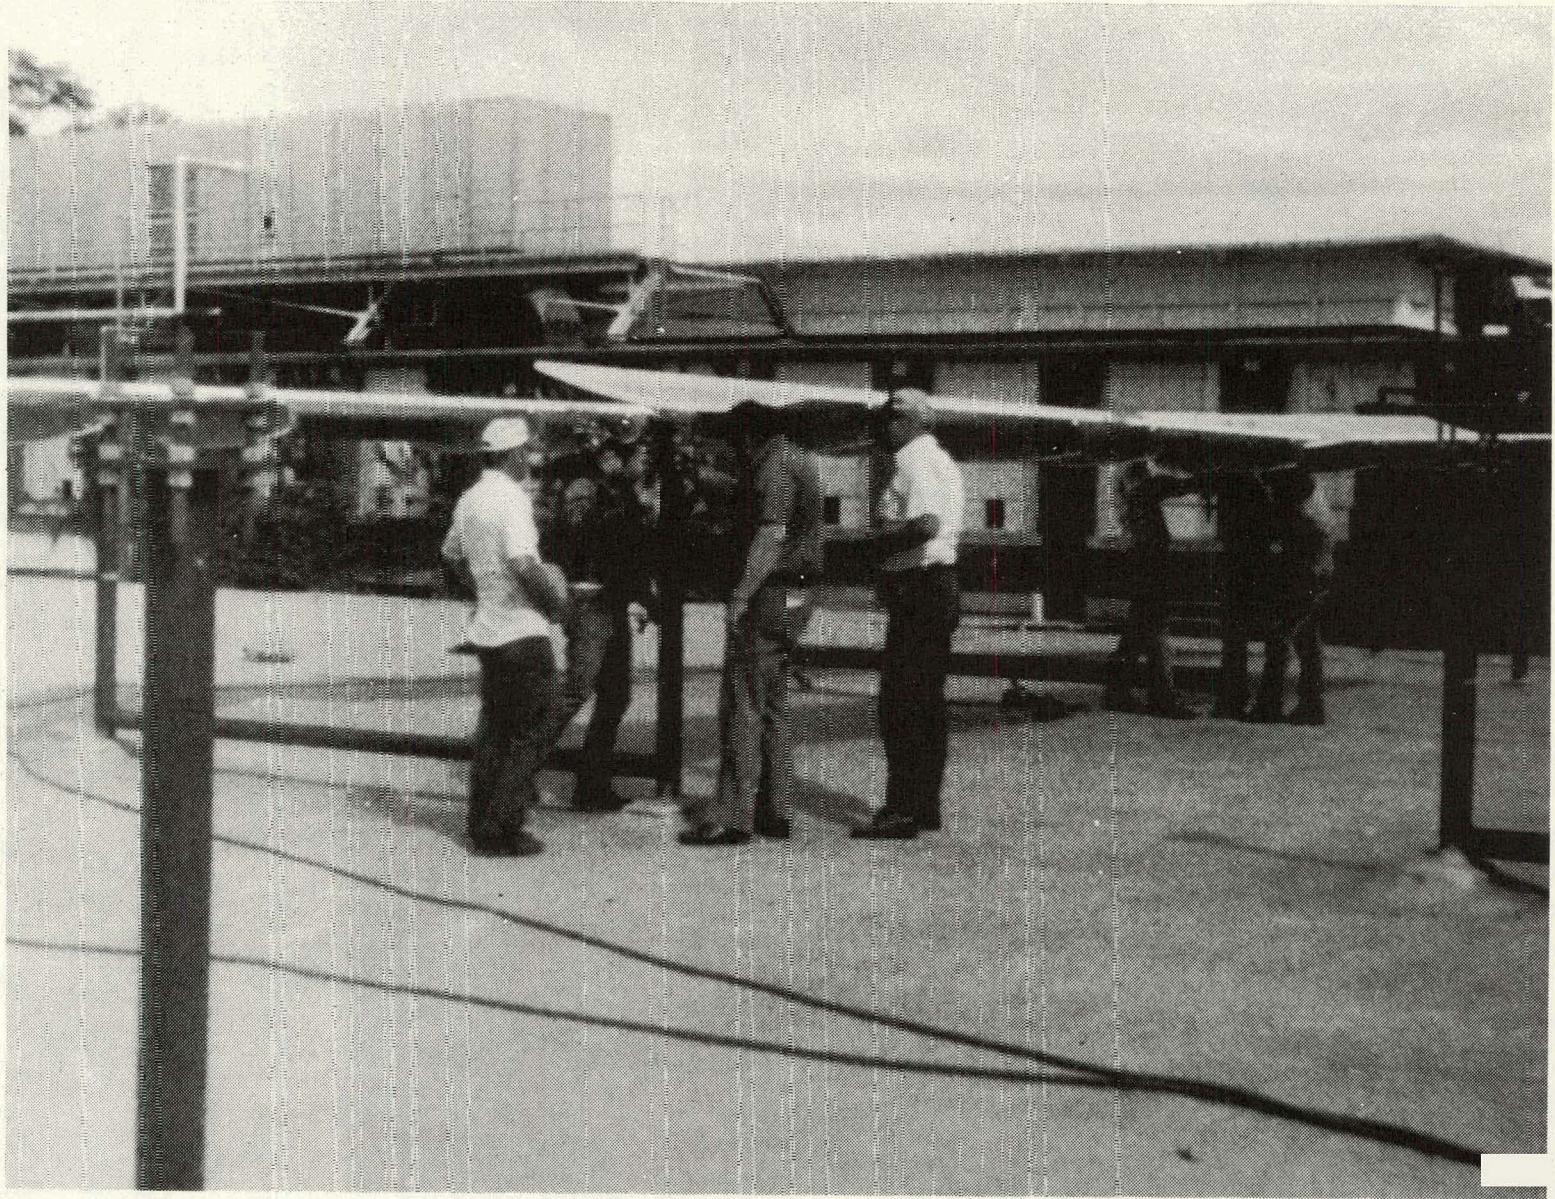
Mounting of Mirror Assembly onto Supports, April 1978
